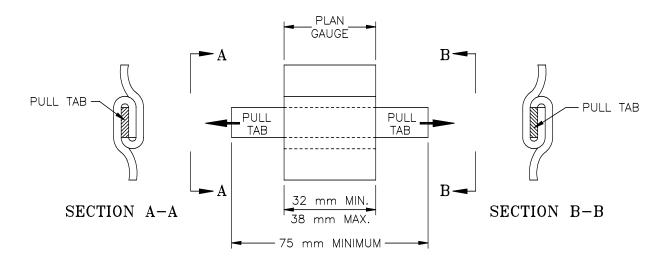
DETAIL OF SPECIMEN FOR SHEAR STRENGTH TEST OF LOCK SEAL
